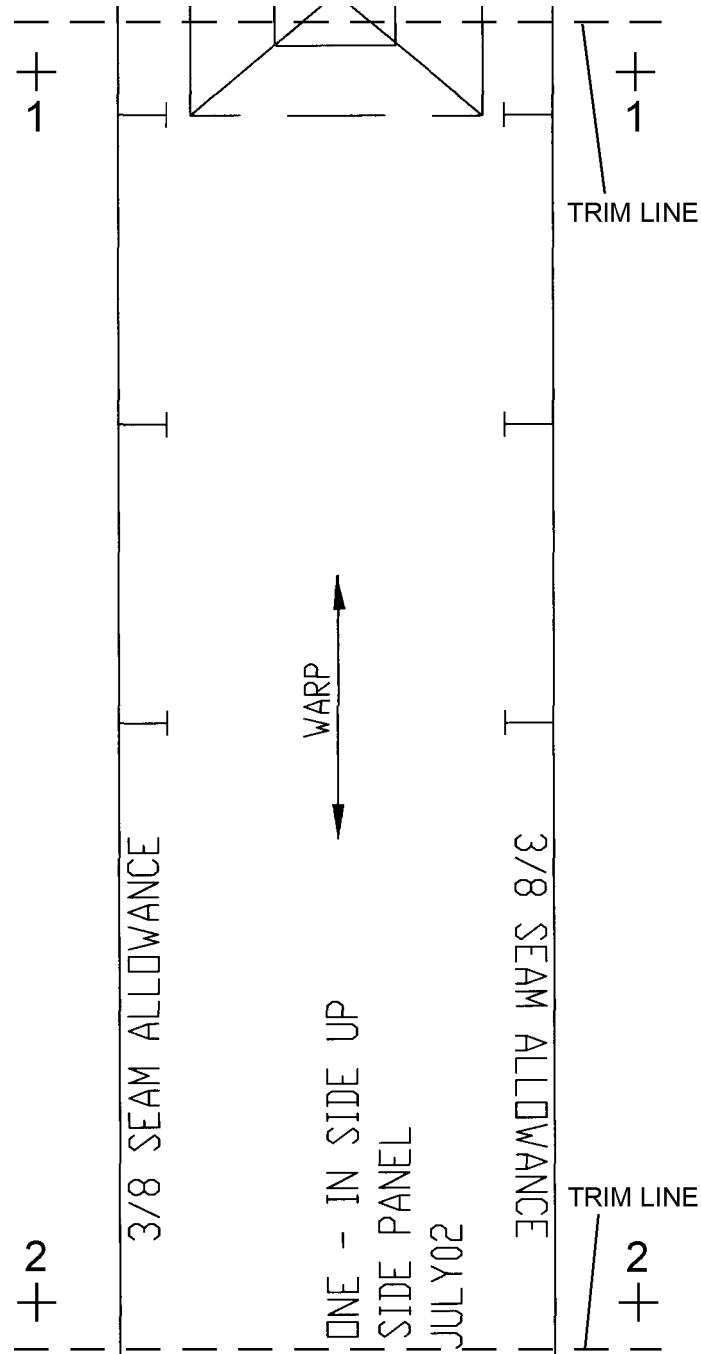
Z. Battery Pocket Side Panel Pattern (Sheet 2 of 3)
